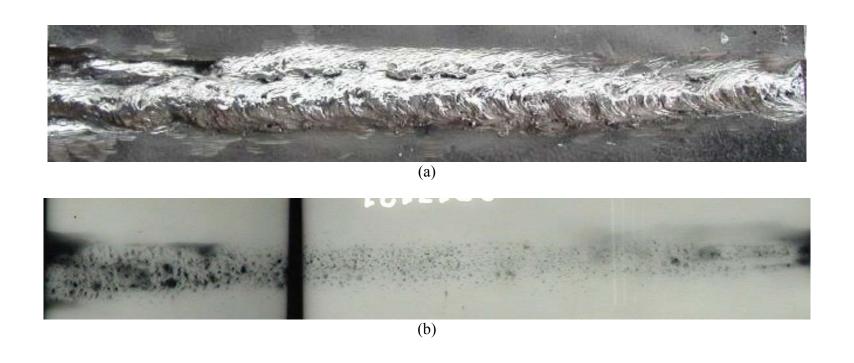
(a) V-groove wet weld deposited with E7024 electrode type on A36 steel at 50 m and (b) its radiographic image.
